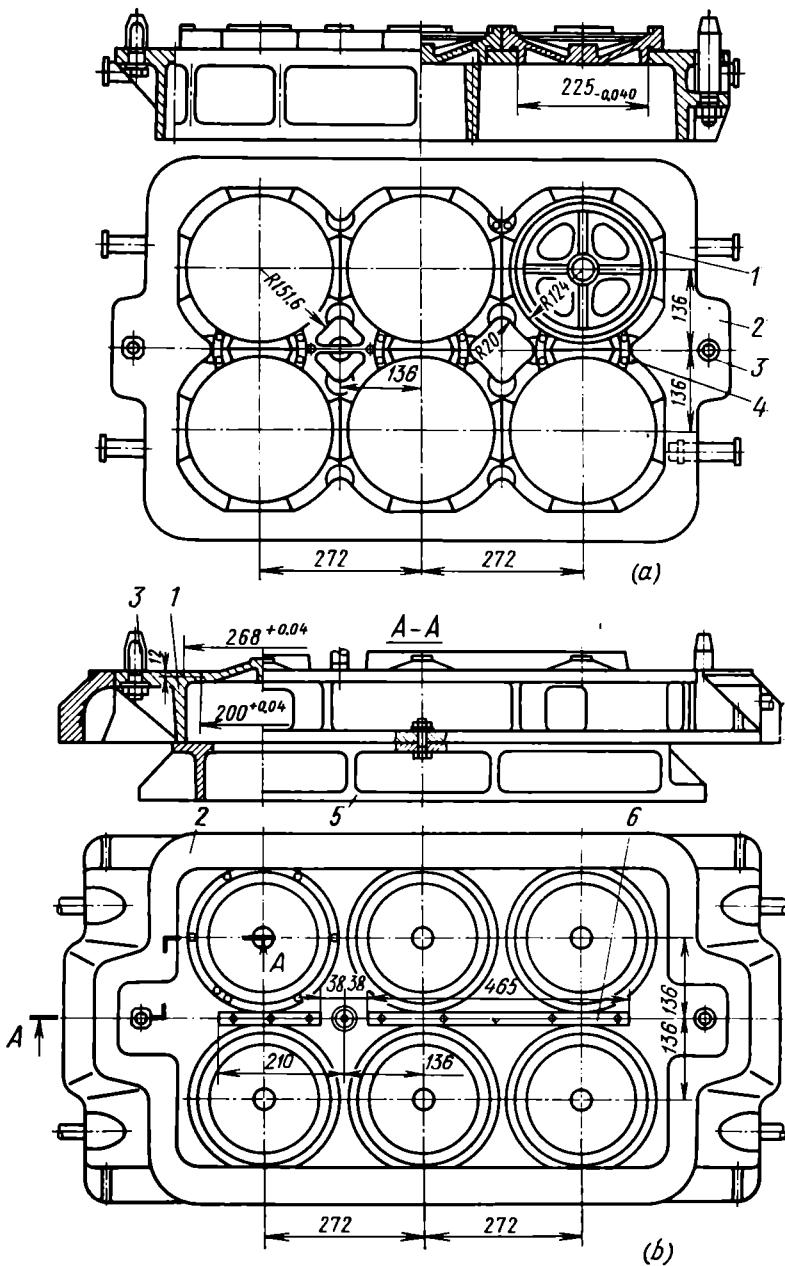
Pattern plates used in the manufacture of a pulley casting
